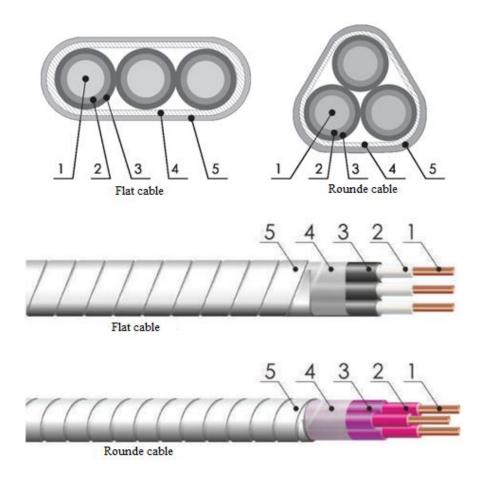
Schematic drawings of the cross-section of cables and the form of structural elements: 1) conductor; 2) the first layer of insulation; 3) the second layer of insulation; 4) bedding; 5) armour
